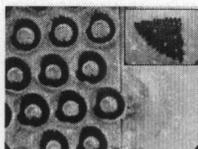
Top view of a cobalt plate after laser cutting. The diameter of the inner cores are ~60 μm.
